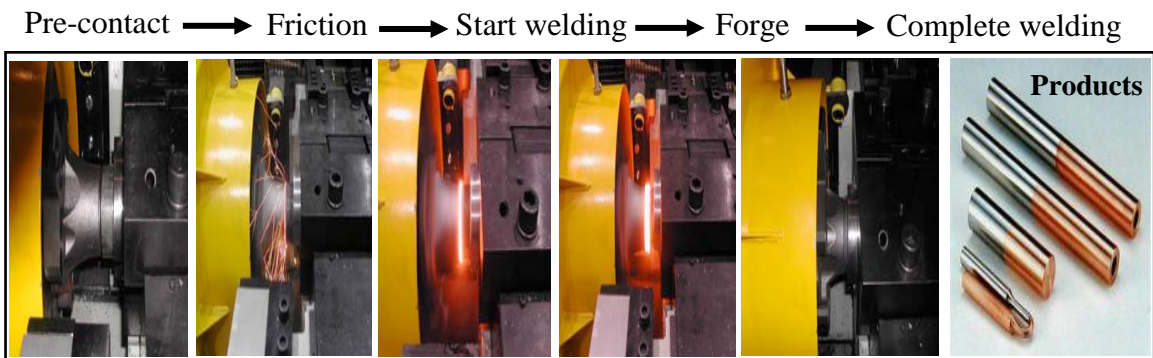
Rotary friction welding process (Sanders, 2001)
